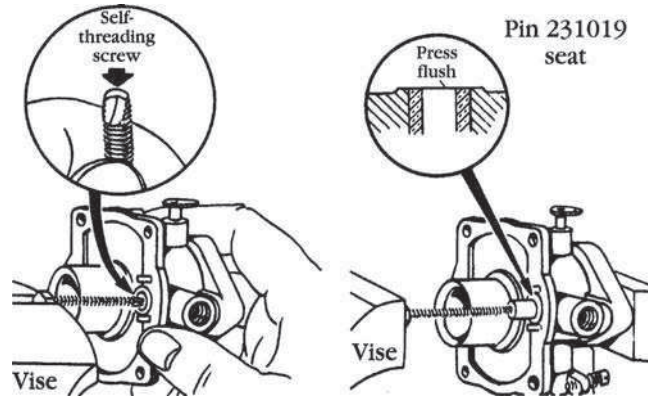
Briggs & Stratton uses elastomer inlet seats, which are extracted with a self-tapping screw and pressed into place using the original seat as a buffer. In the case of the one-piece Flo-Jet, the seat should be flush with the raised casting lip.
